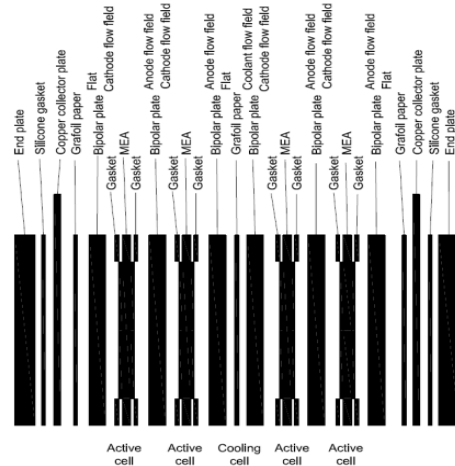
Schematic, exploded view of the short fuel cell stack arrangement.
